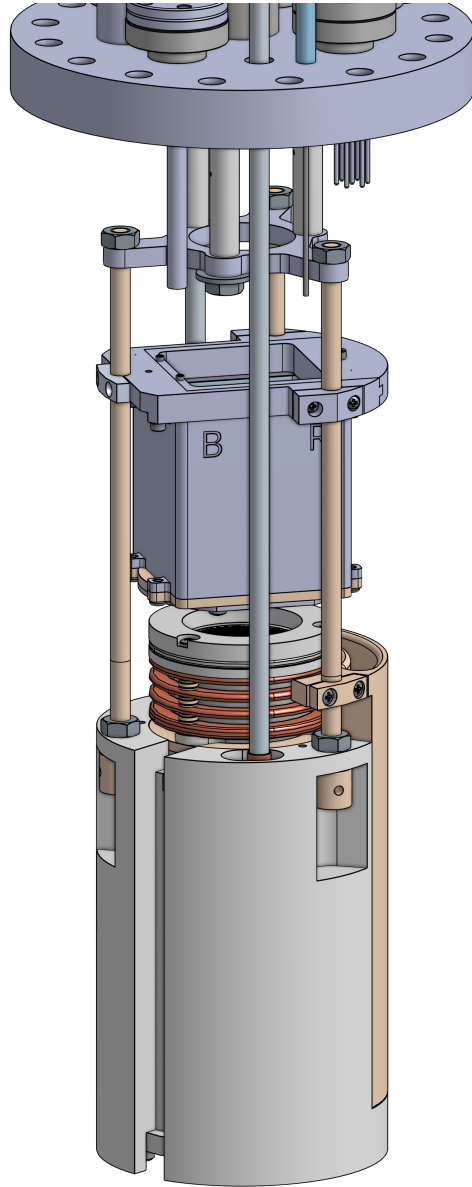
XeNeu detector components. At the bottom of the detector assembly is a large cylindrical PTFE piece which houses the bottom PMT (Figure 4.5a). The field cage (Figure 4.4a) is mounted to the top of the bottom PMT holder. The weir reservoir is machined from a single block of PEEK and sits in a dedicated cutout on the side of the bottom PMT holder. The weir height is independently adjustable with clamps on two of the vertical support rods. Directly above the field cage is the top PMT assembly (Figure 4.6), which clamps to all three support rods. High voltage feedthroughs are welded to the detector top flange, and descend into slots machined into the top of the bottom PMT holder.
